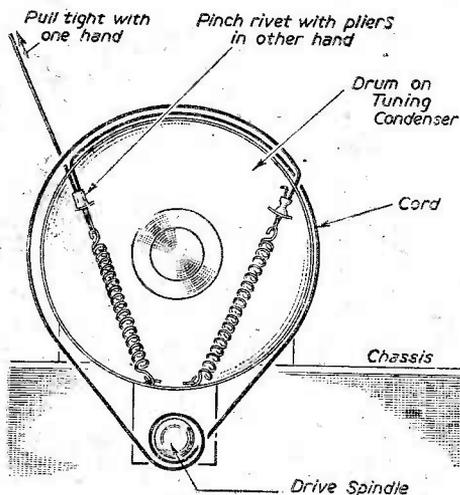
The simplest type of cord drive showing method of terminating cord.
